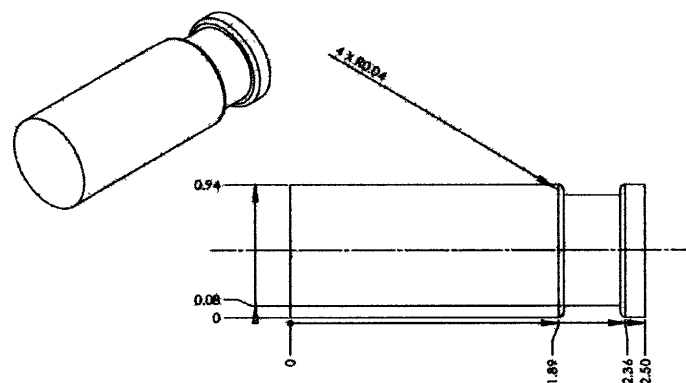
Inner workpiece specimen for the last series of experiments with the fieldshaper.
